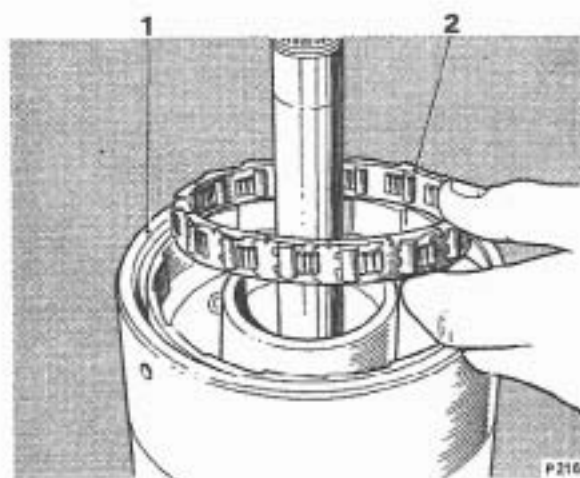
FITTING THE ROLLER CLUTCH ASSEMBLY TO THE REACTION CARRIER (ROLLER CLUTCH)
